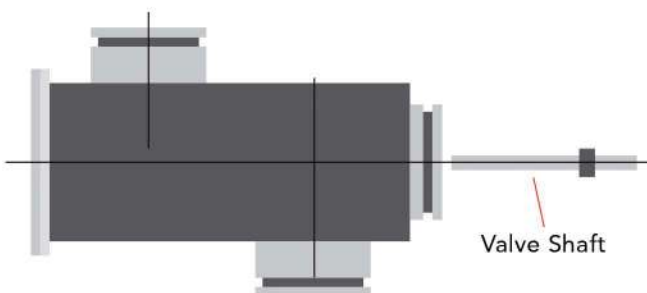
REMOVE O-RINGS IN PACKING GLAND
